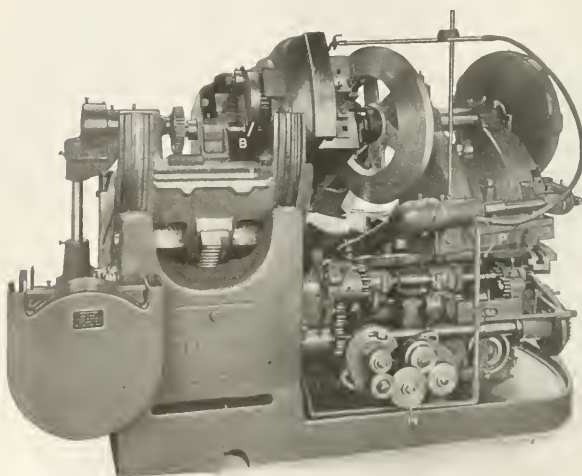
Covers removed to show Graduated Crank-plate B, Change-gears H and Oil Tubes P
